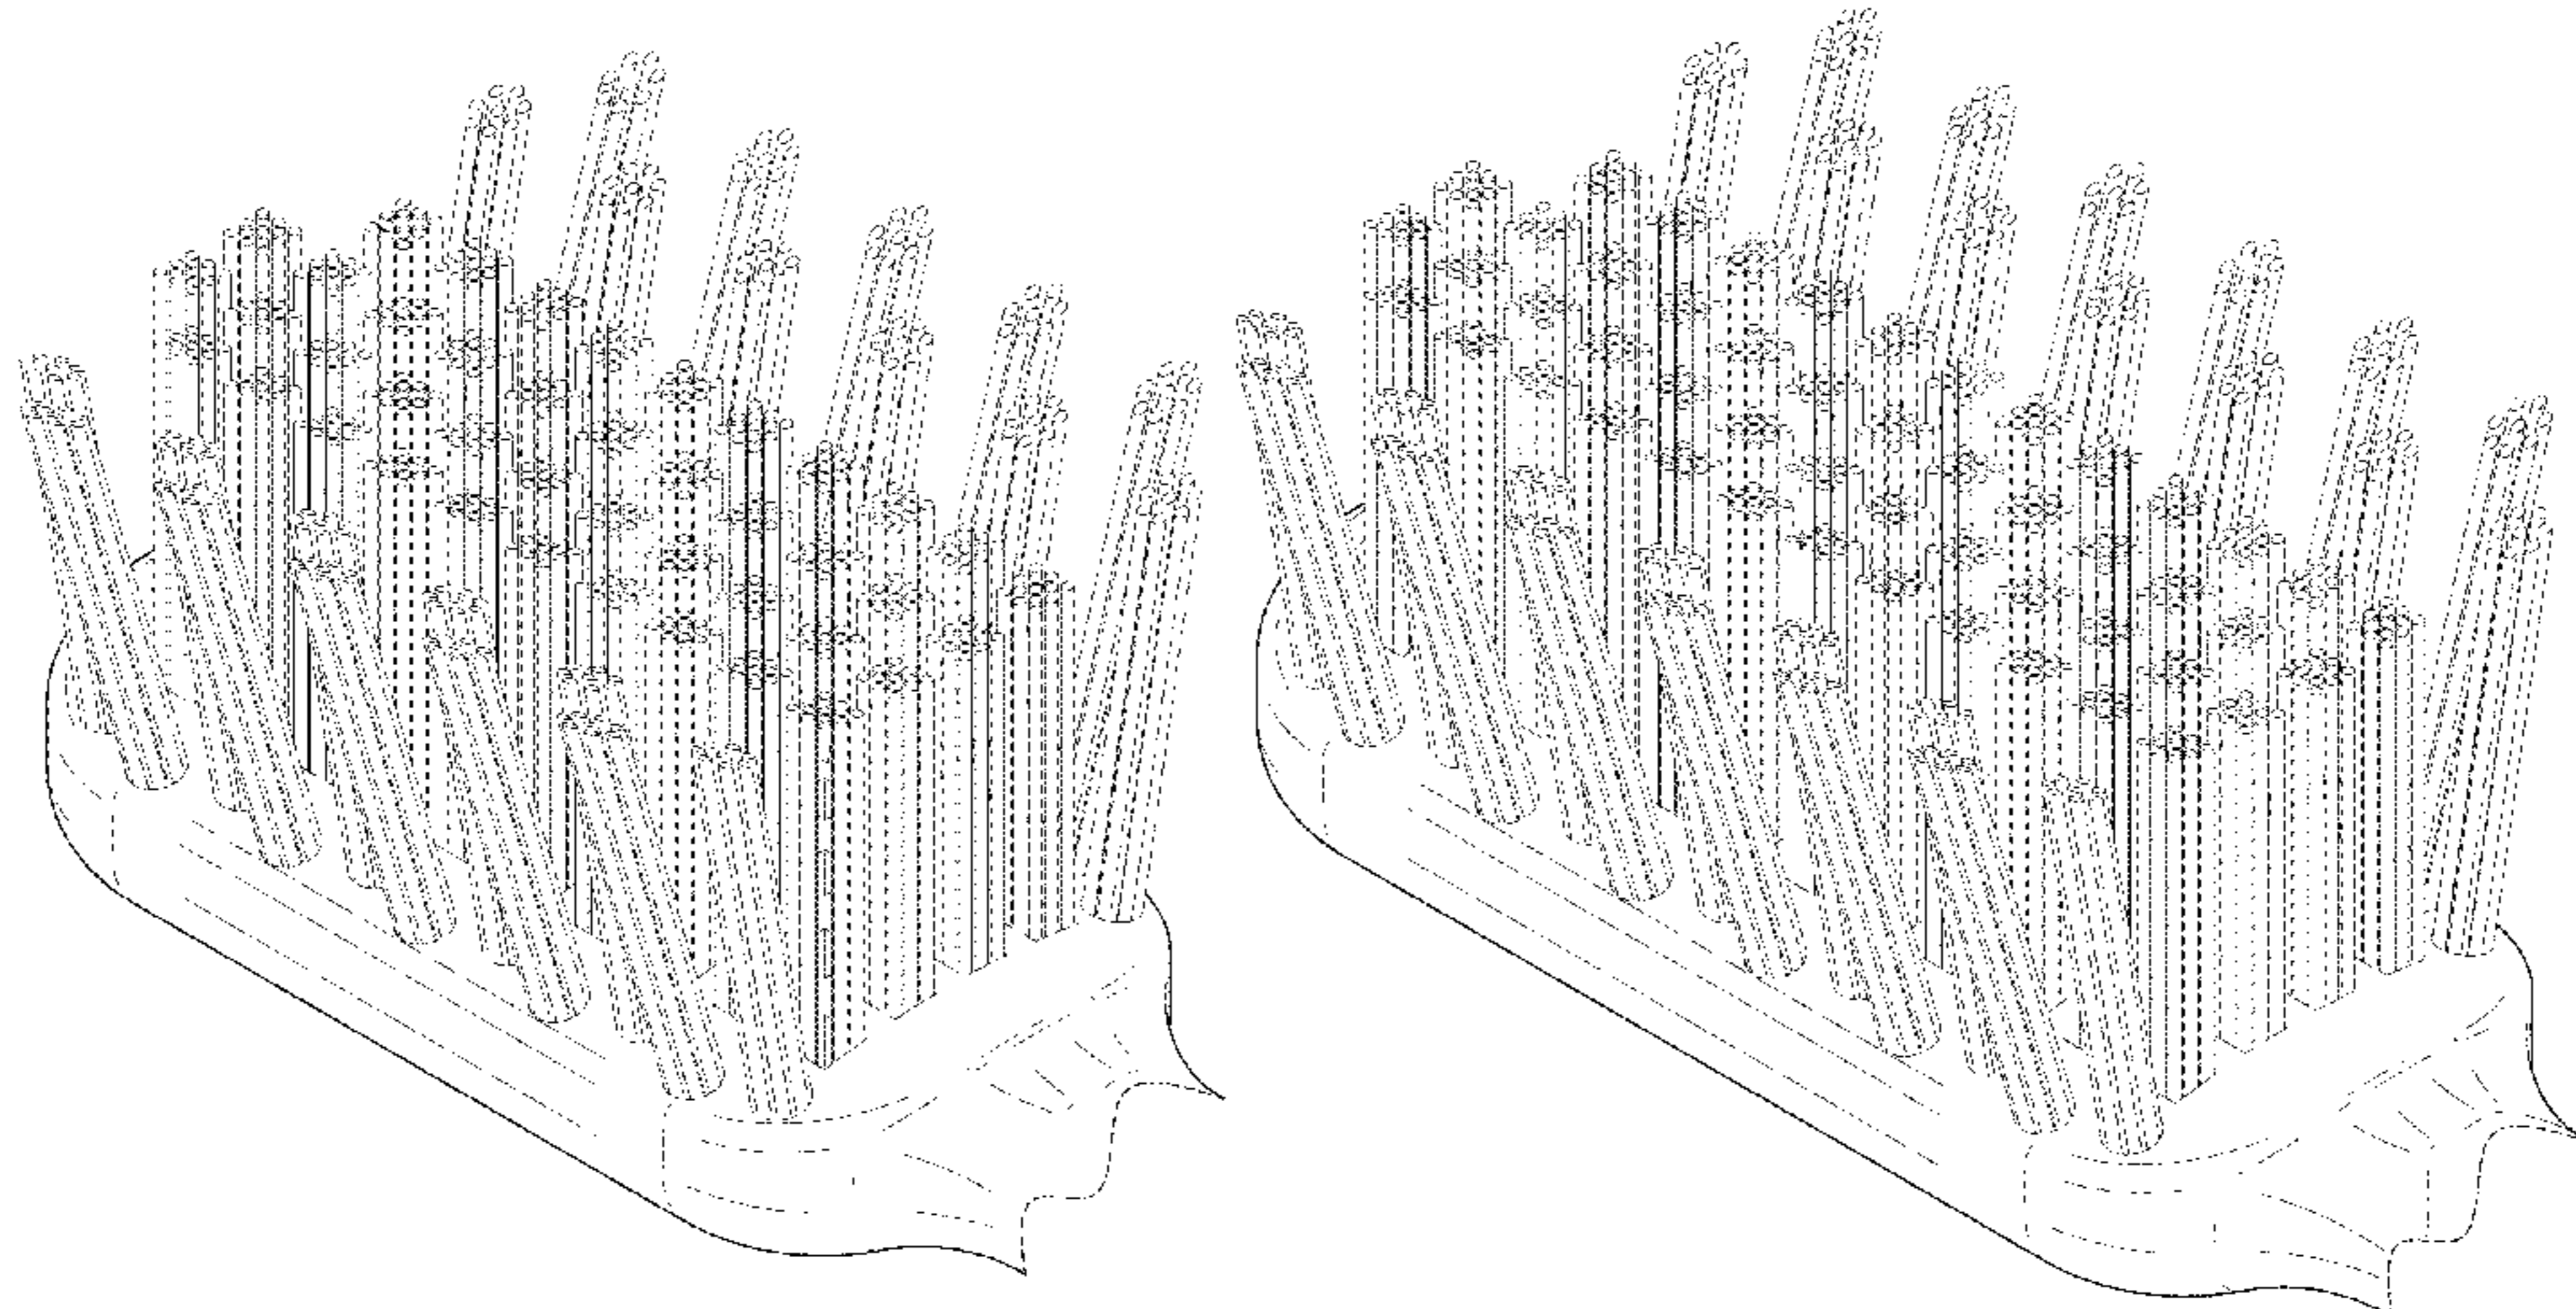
is a perspective view of a fourth embodiment of the toothbrush showing the handle of the toothbrush in phantom.
